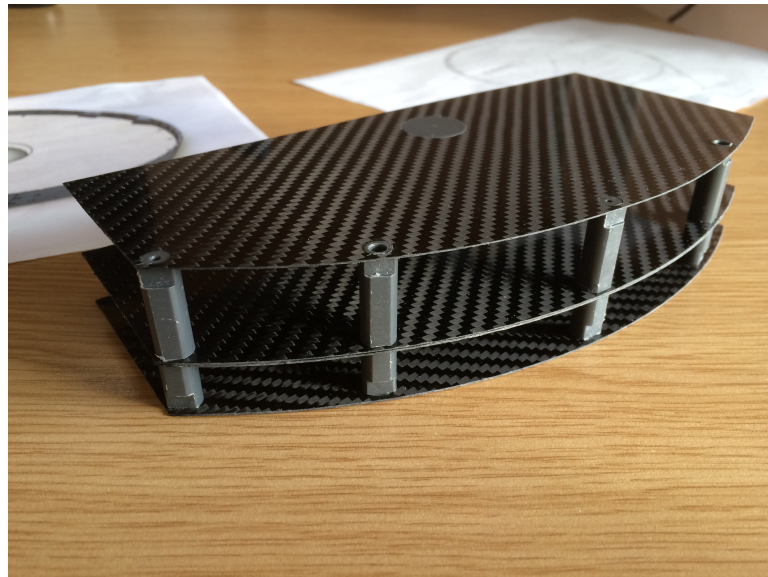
A cutaway showing a prototype of the outer spacers used to hold in place and support the carbon fibre discs in the Hodoscope.
